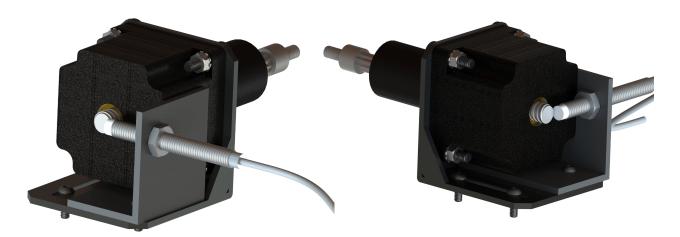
Fully Assembled View of Actuator and Servo Center Sensor Assembly
